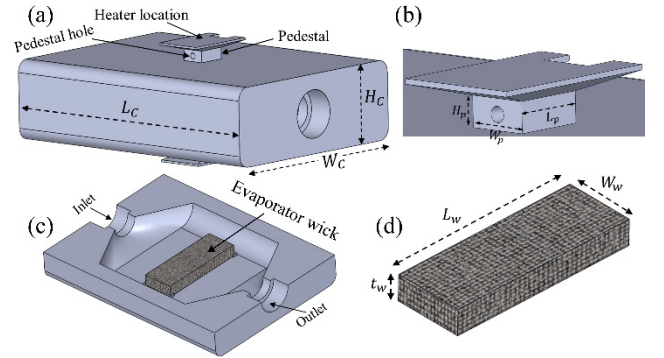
CAD model of the (a) cold plate, (b) pedestal, (c) interior of the wicked SiC cold plate, (d) evaporator wick.
